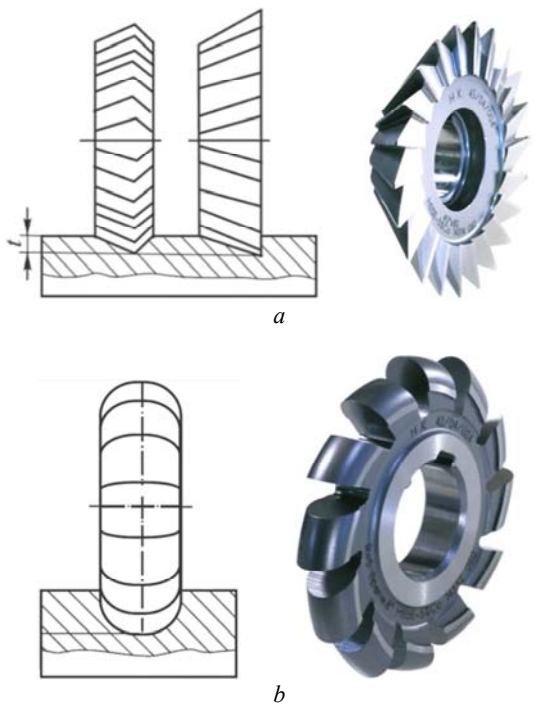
Angle cutters (a) and form milling cutters (b) cutters
